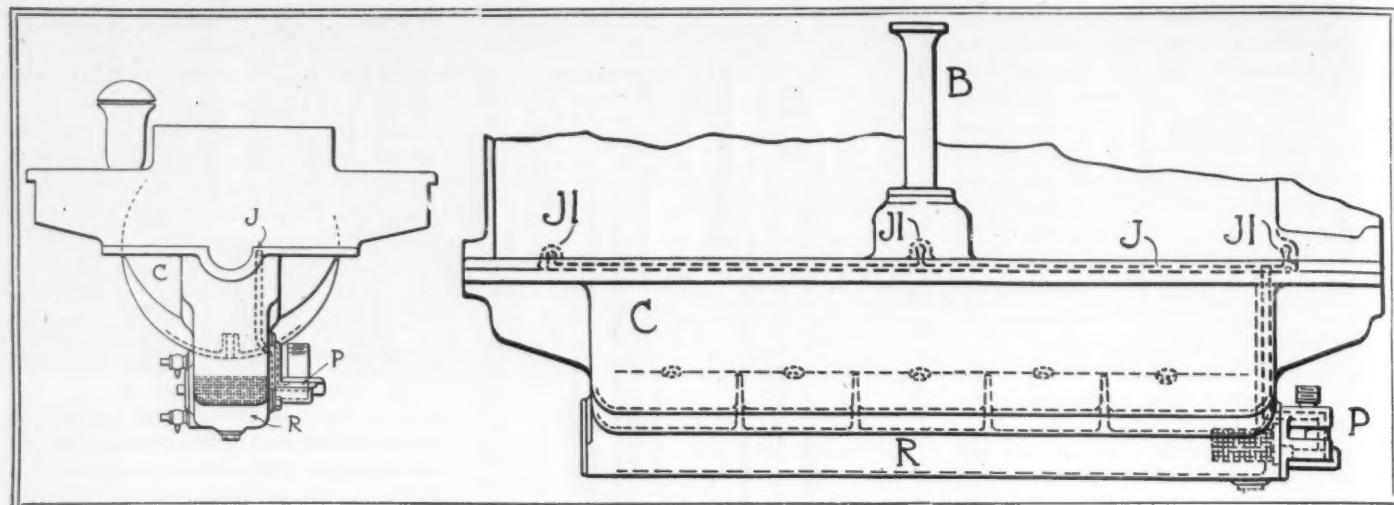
END AND SIDE SECTION OF OILER SYSTEM IN CONTINENTAL MOTORS
